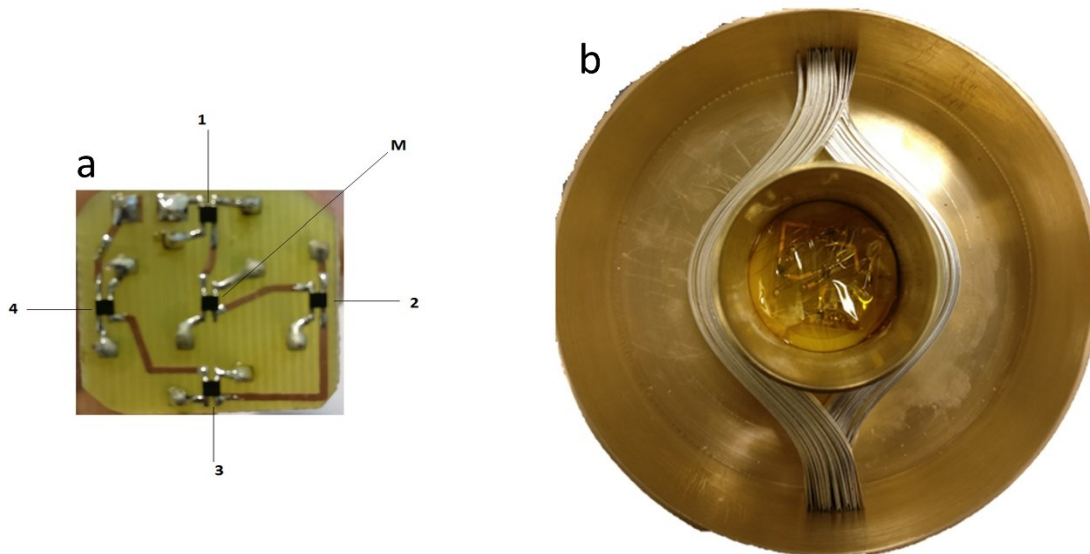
a) PCB with five soldered sensors labelled as 1, 2, 3, 4 and M. b) Hall sensor PCB position in the middle tube of the cup with a stack of HTS rings.
